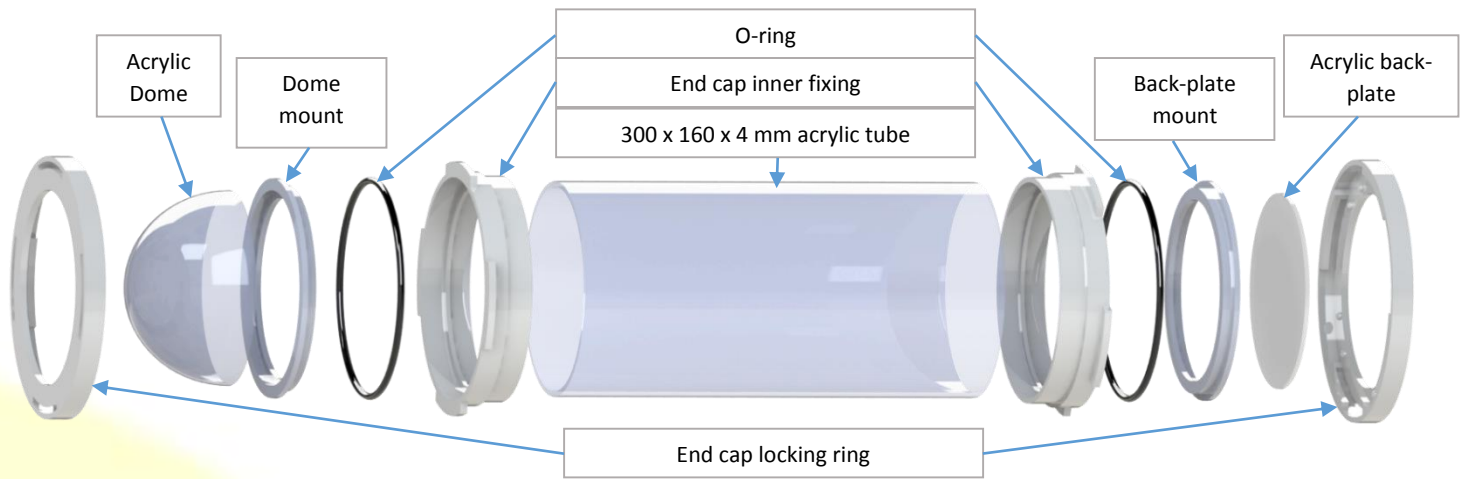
Solidworks rendered image of pressure vessel components, exploded view.
